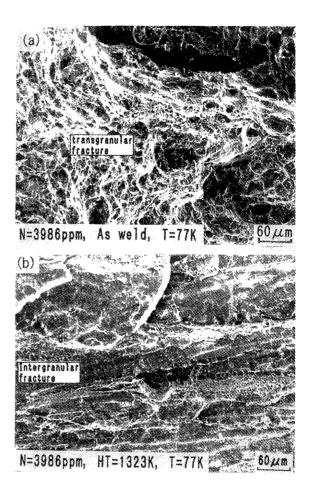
Fractography of fracture surface Charpy impact specimen at low temperature (77K).
